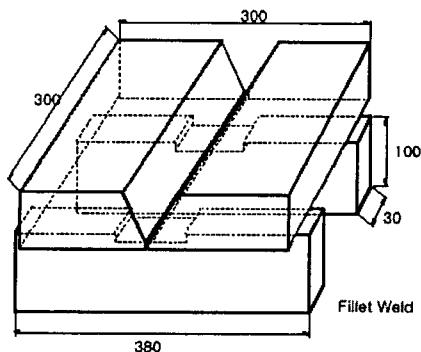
Preparation of base plates for multipass weld metal cracking test.
